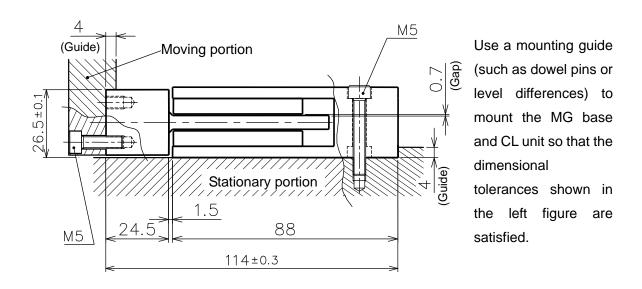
Mounting dimensions of the standard type (bottom installation)
